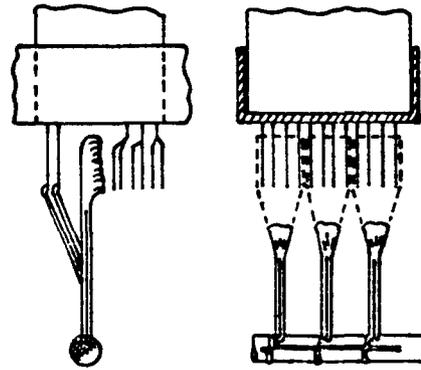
SINGLE FORM SERVING TWO PIECES OF APPARATUS (PAR. 3.14)
